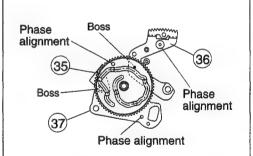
(b) Removing the Centering Arm Assembly 37
